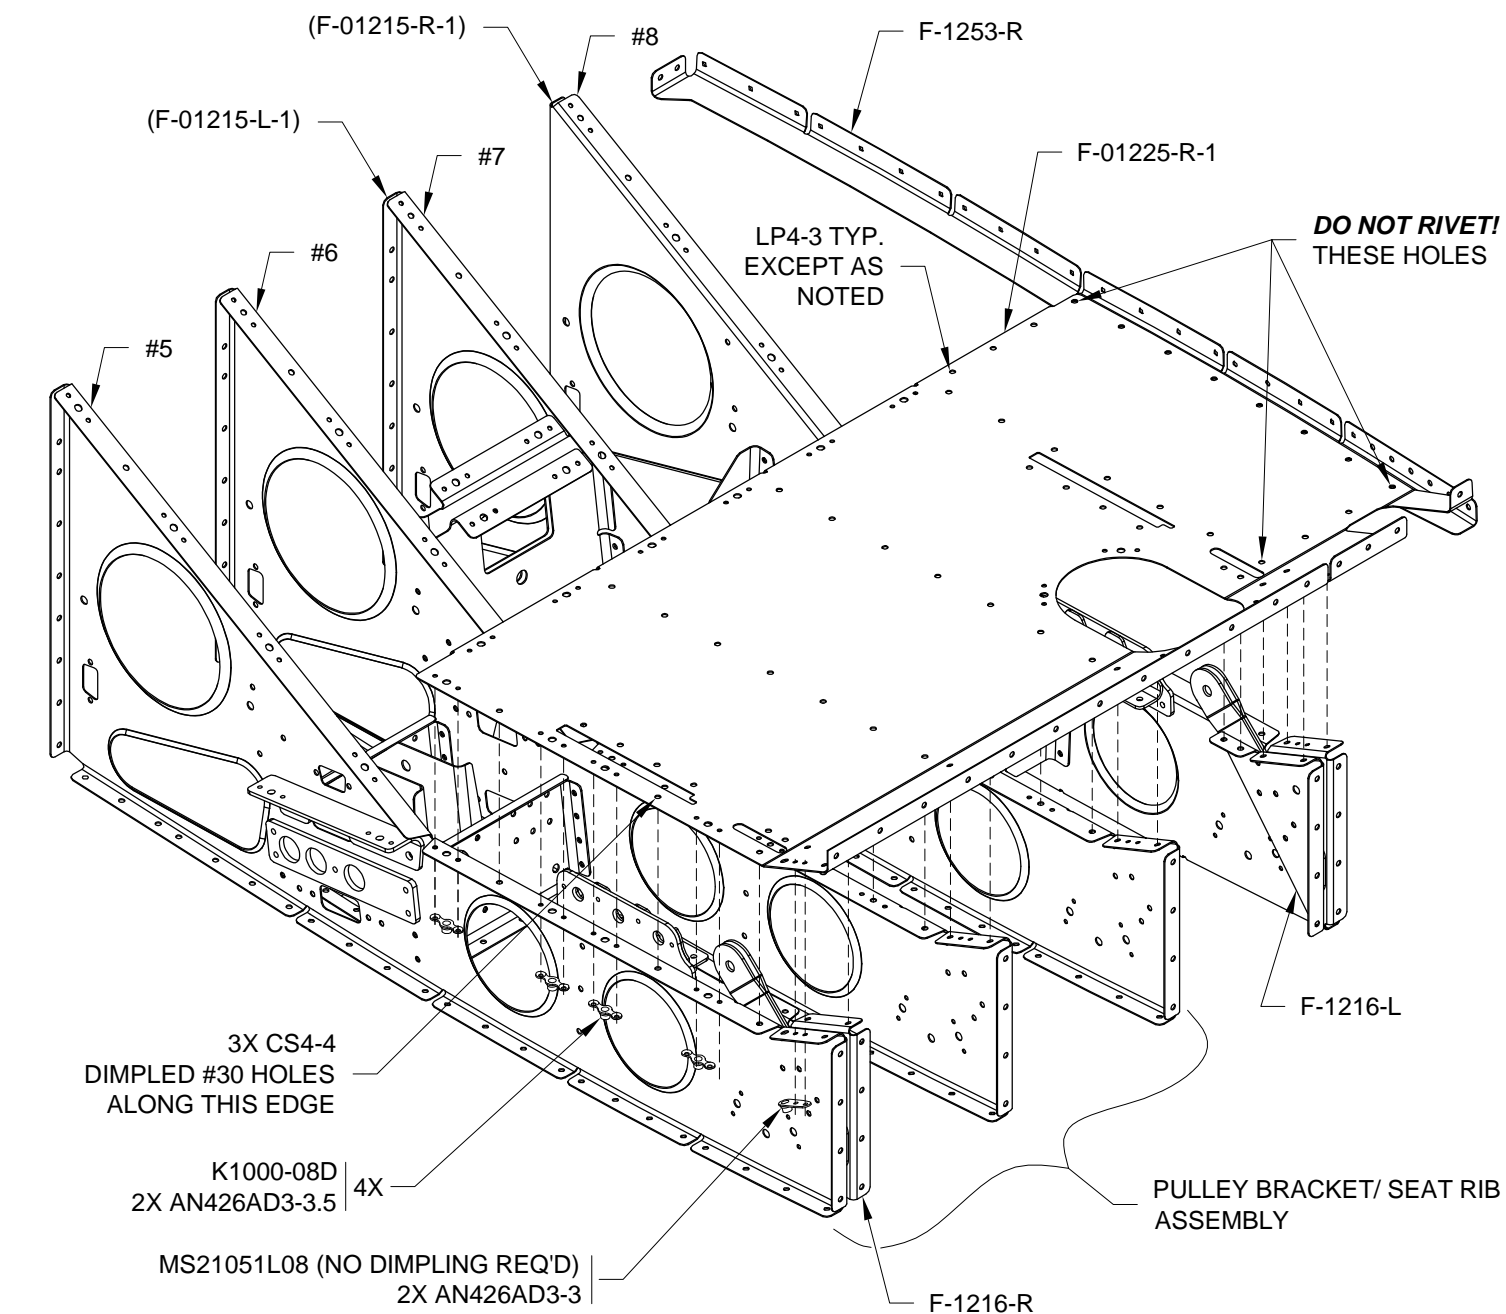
RIVETING RIGHT SEAT FLOOR
